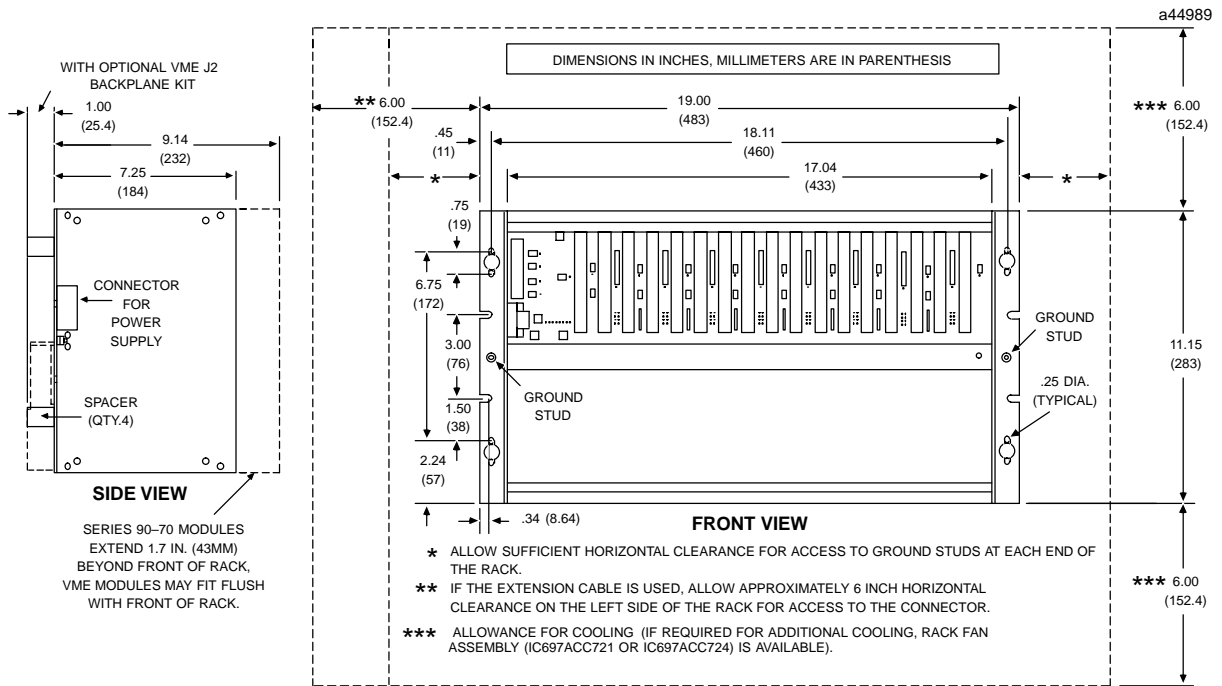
VME Integrator Rack Dimensions for Rack (Rear) Mount
